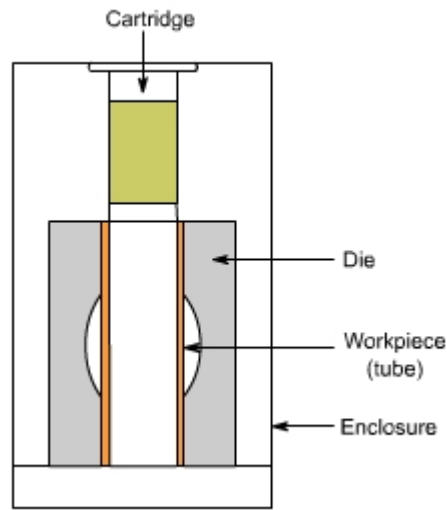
Schematic illustration of contact technique of explosive forming.
